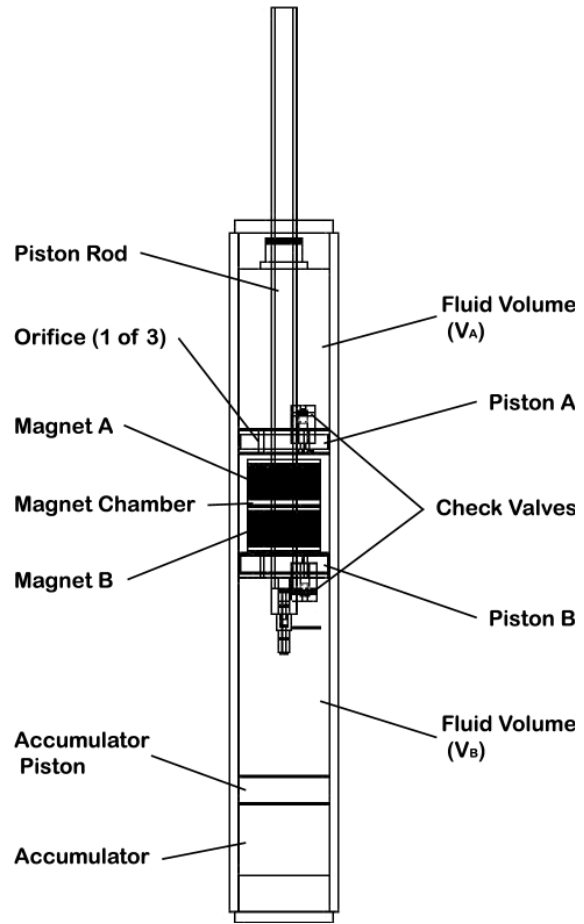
A drawing of the damper cylinder body and valve mechanism.
